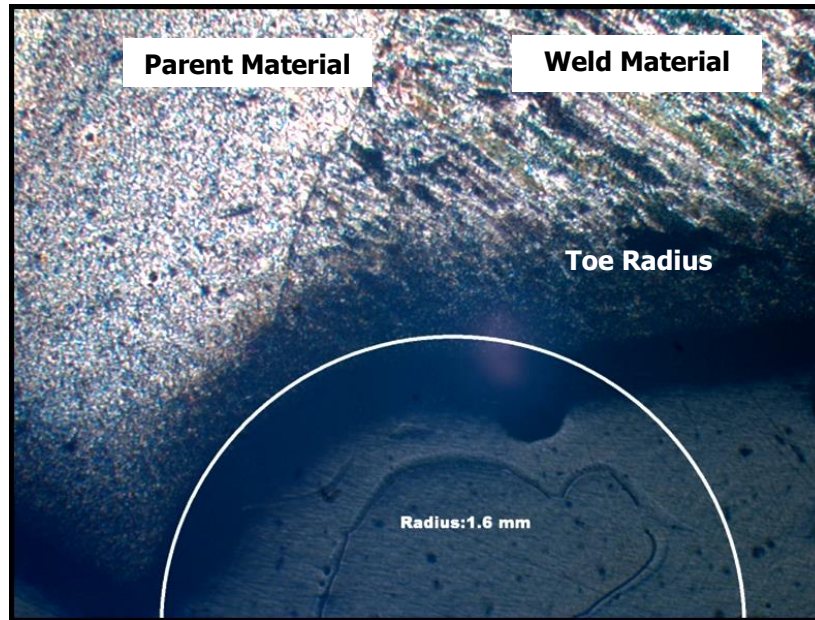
Typical weld toe section showing measurement of the radius.
